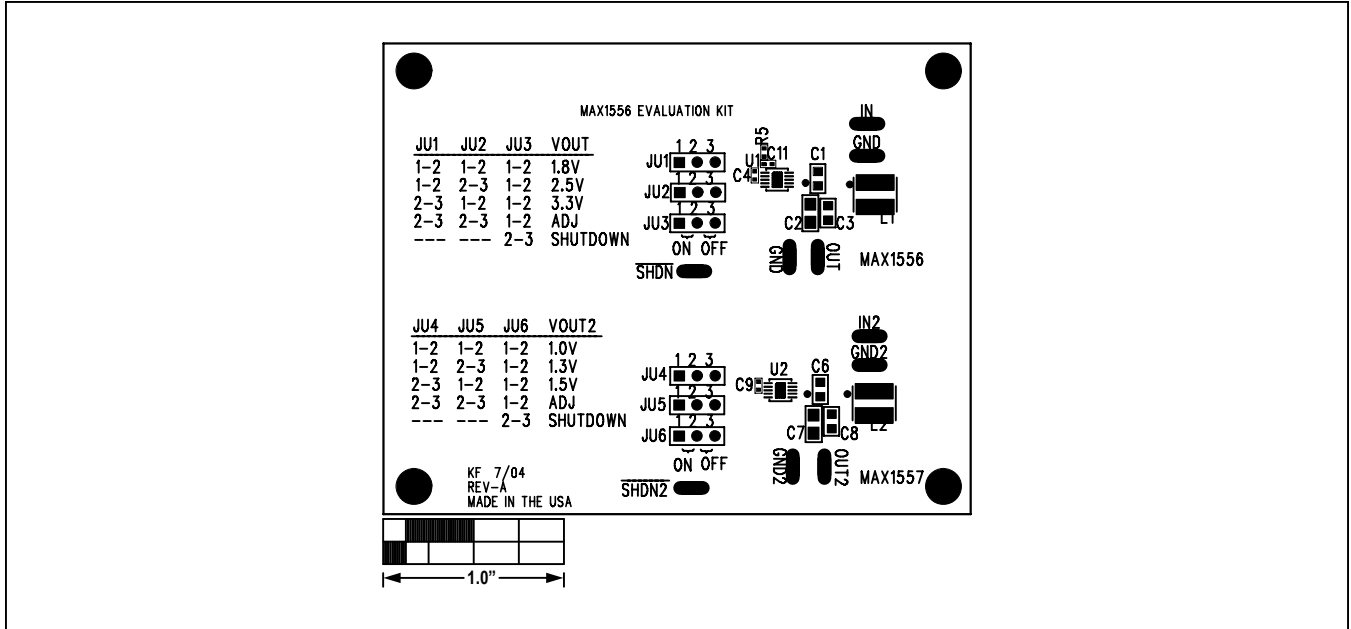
MAX1556 EV Kit Component Placement Guide—Component Side
